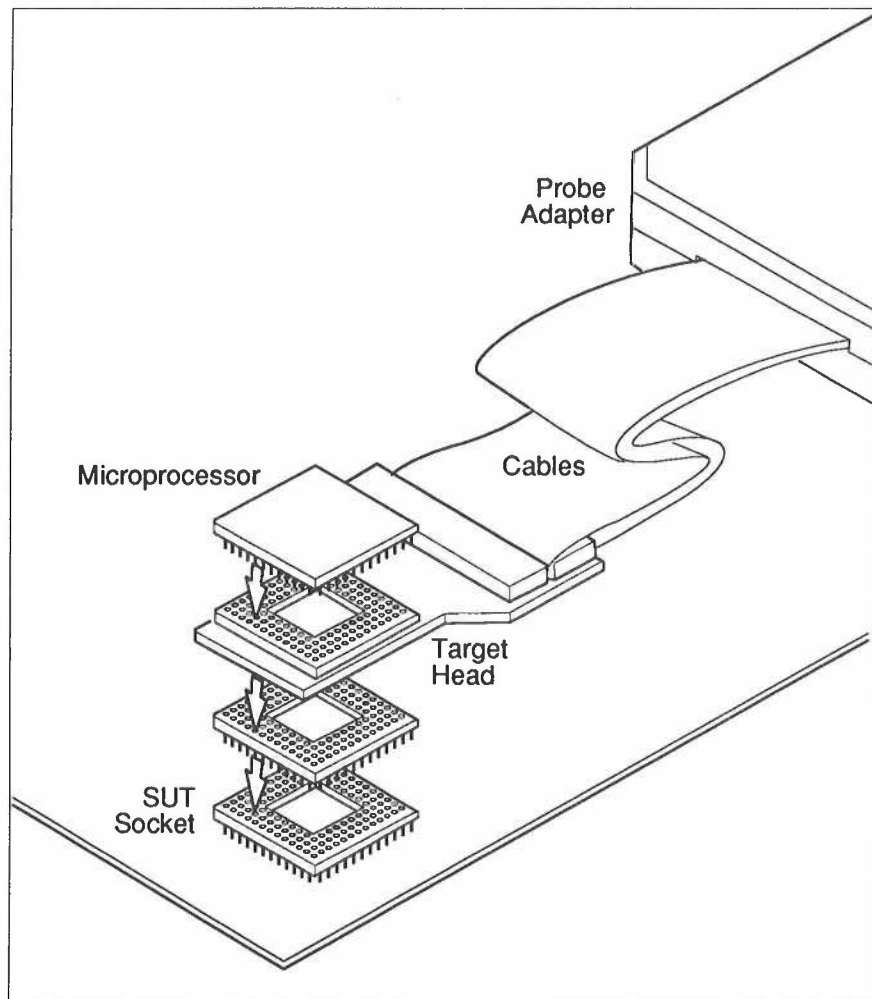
Connecting the disassembly probe adapter to a socketed PGA.
